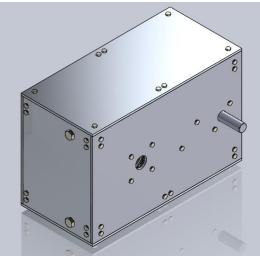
The much simpler geometry will a cheaper easier manufacturing method and still allow our team to test the entire drivetrain by containing an oil bath.
